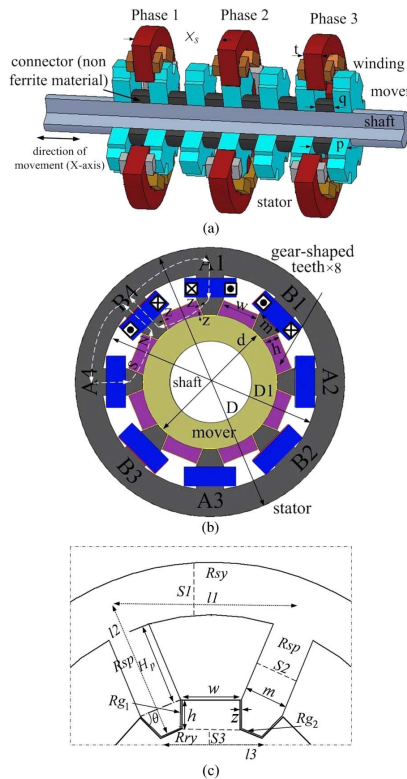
The tubular linear machine (a) structure of one module (b) front view and (c) one section of the stator.
